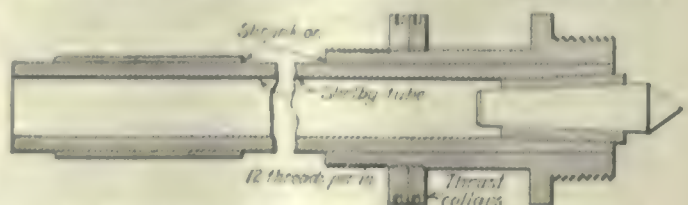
HOLLOW SPINDLE DESIGNED TO REPLACE SOLID ONE
